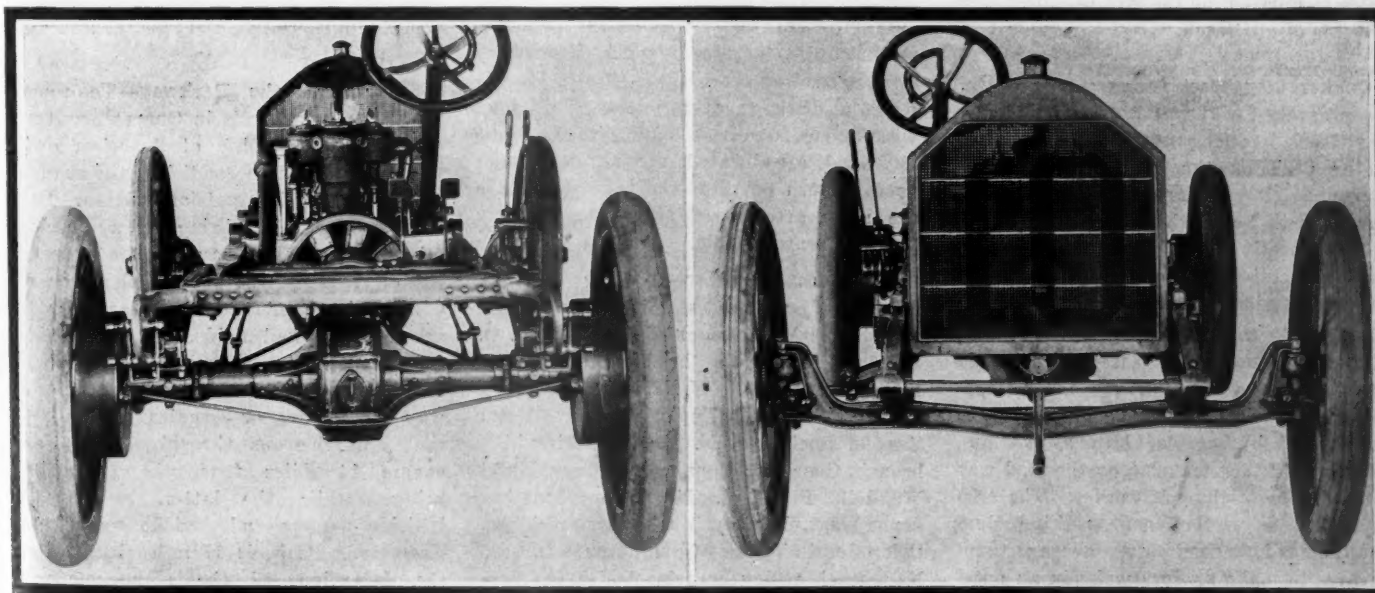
REAR AND FRONT VIEWS OF THE STUTZ, WITH STUTZ REAR AXLE AND TIMKEN FRONT AXLE
